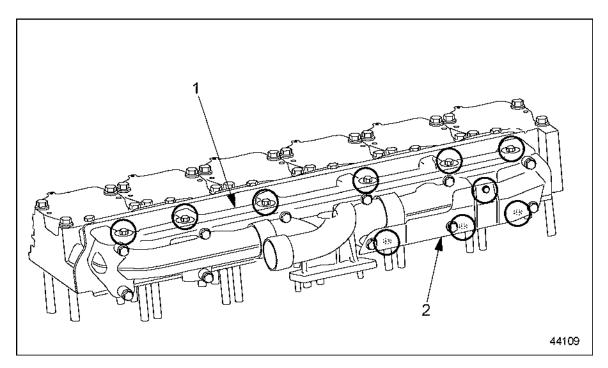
Removing or Installing Three-piece Exhaust Manifold Assembly
